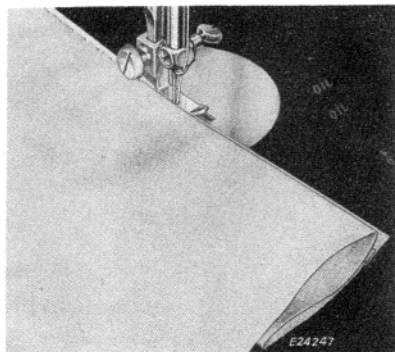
Blind Stitching Hem with Seam Tape Finish
